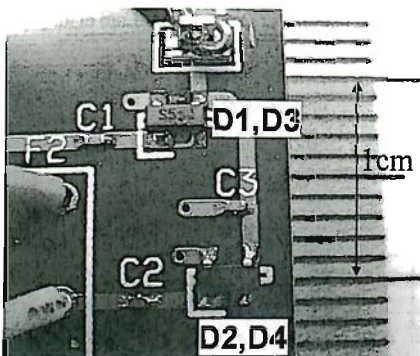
A photograph of the proposed AC-DC converter fabricated on a PCB.
